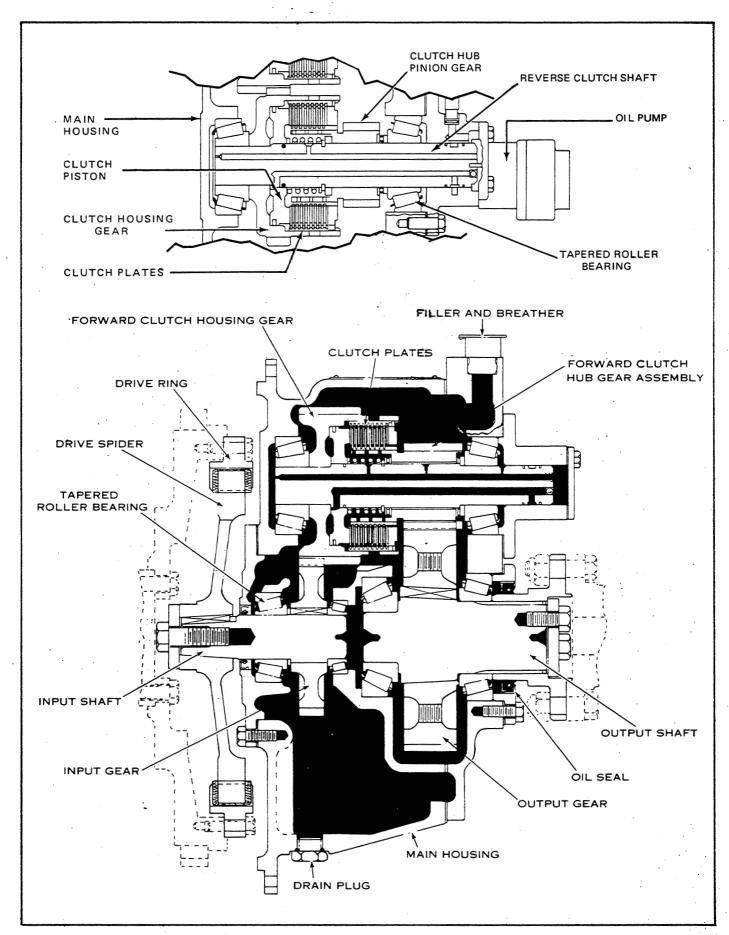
MG-506-1 Marine Transmission — Cross Section Drawing.
